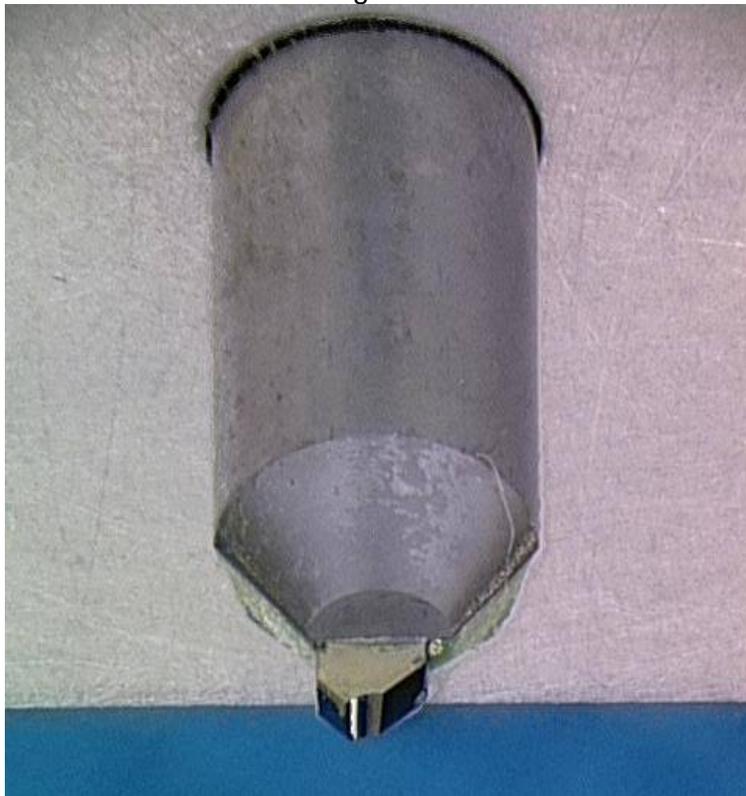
A Close-up Image of the Diamond Milling Tool Showing the Cylindrical Relief Angle Cut Into the Tool Below the Tool's Cutting Edge. The Tool Shank Is 3.1mm.
